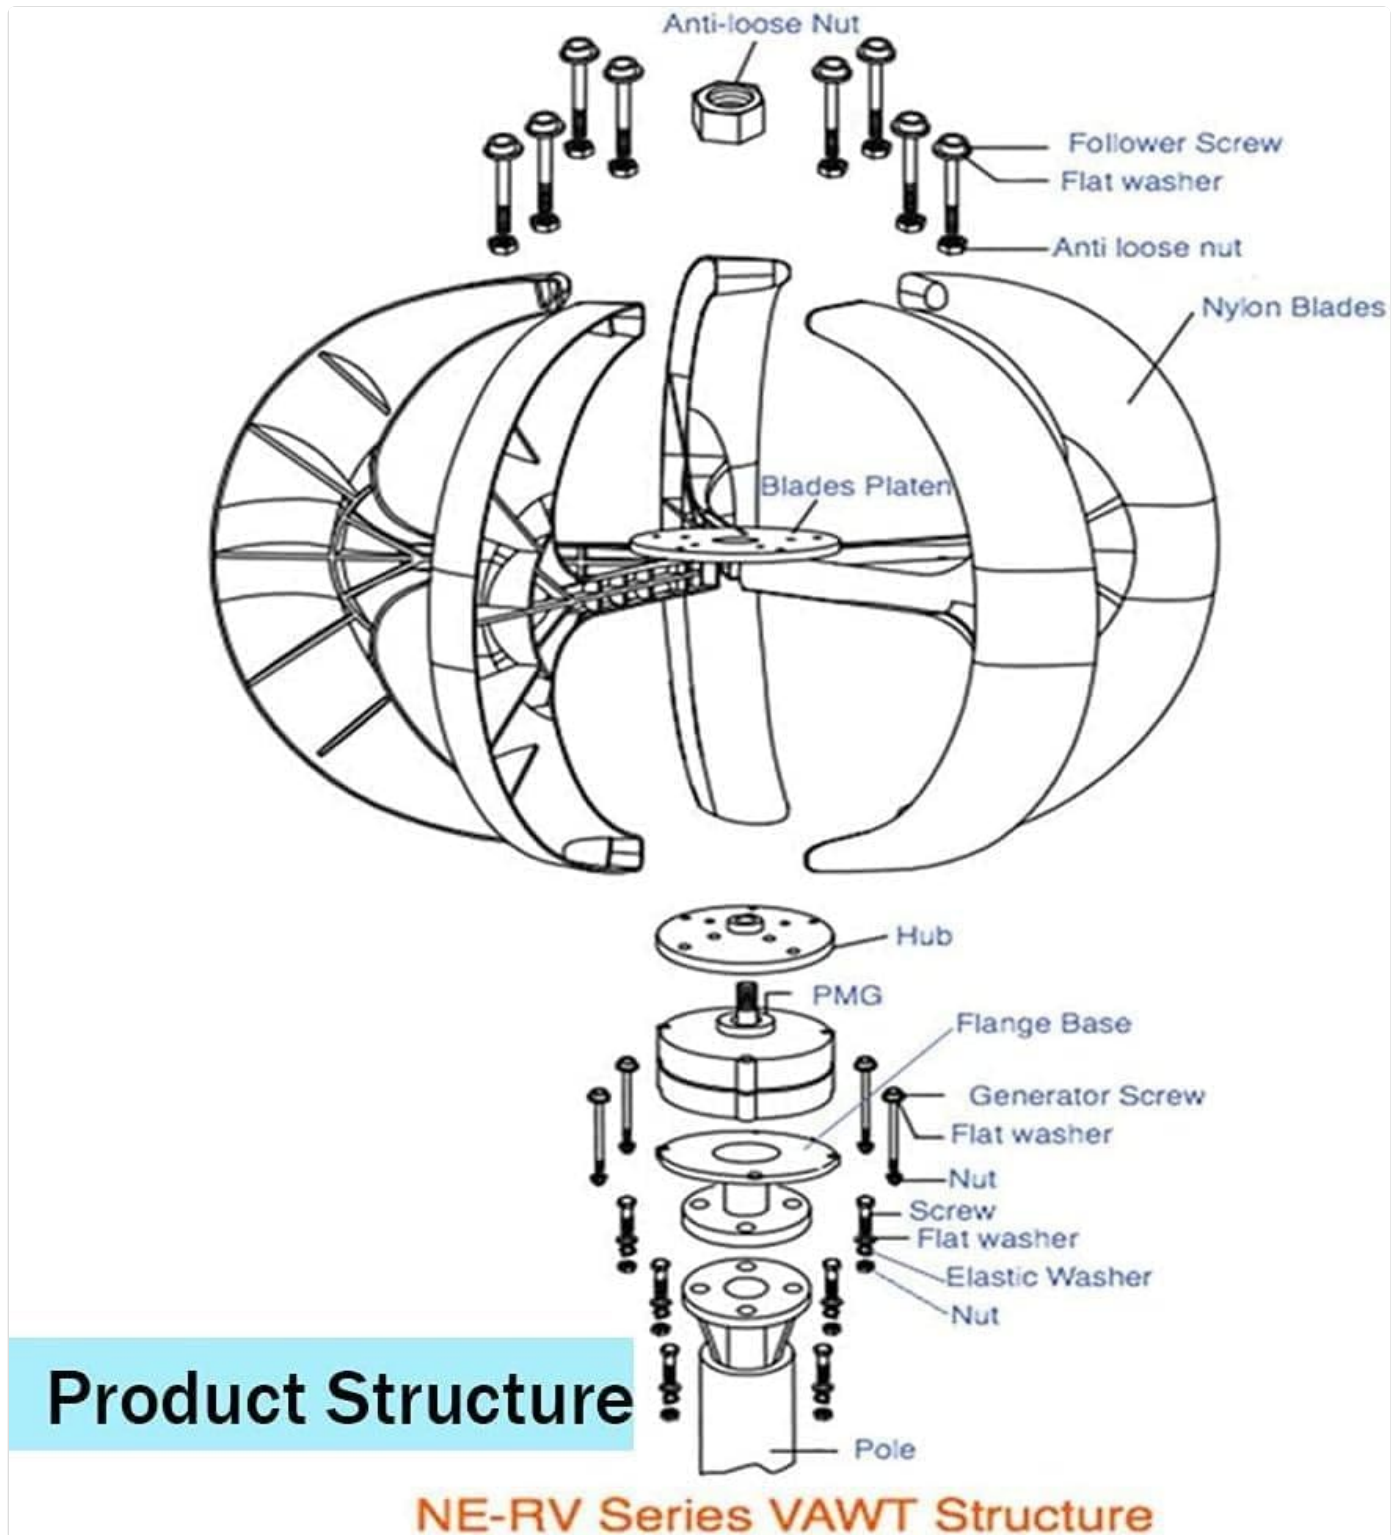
Exploded view of the wind turbine, showing individual parts such as anti-loose nuts, follower screws, flat washers, nylon blades, blade plates, hub, PMG (Permanent Magnet Generator), flange base, generator screws, and pole connection.
